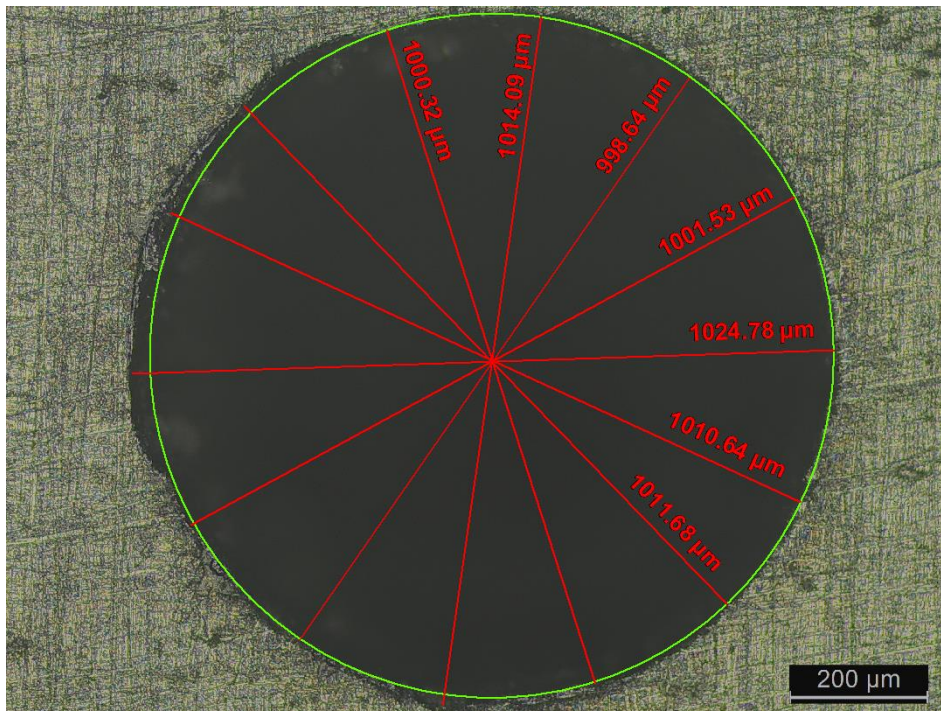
Measurement of the hole diameter produced by single-pulse drilling using Nd:YAG laser ( $P_e = 20$  J,  $P_d = 6$  ms,  $t = 1.0$  mm, assist gas = compressed air)
